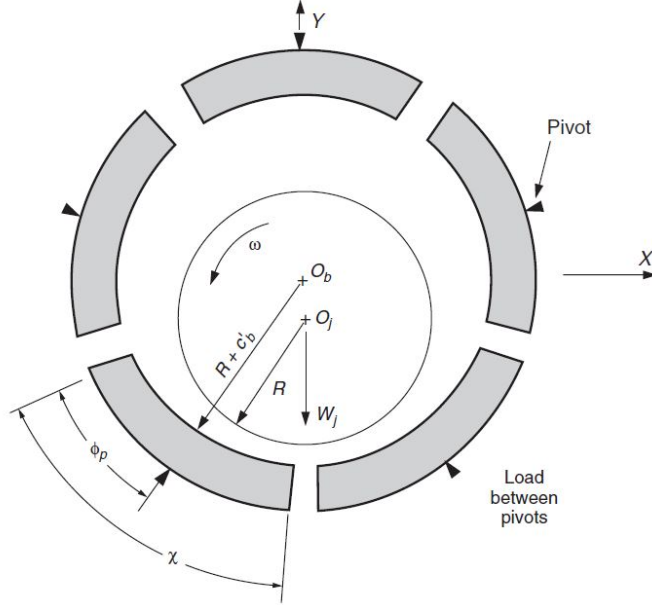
Five-pad tilting pad bearing schematic API 684 [3].
